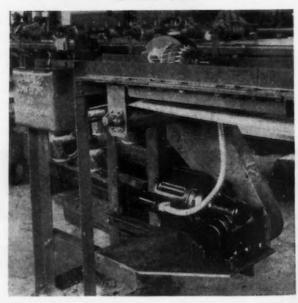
Buss double surfacer as equipped with Ratiomotor drive.
